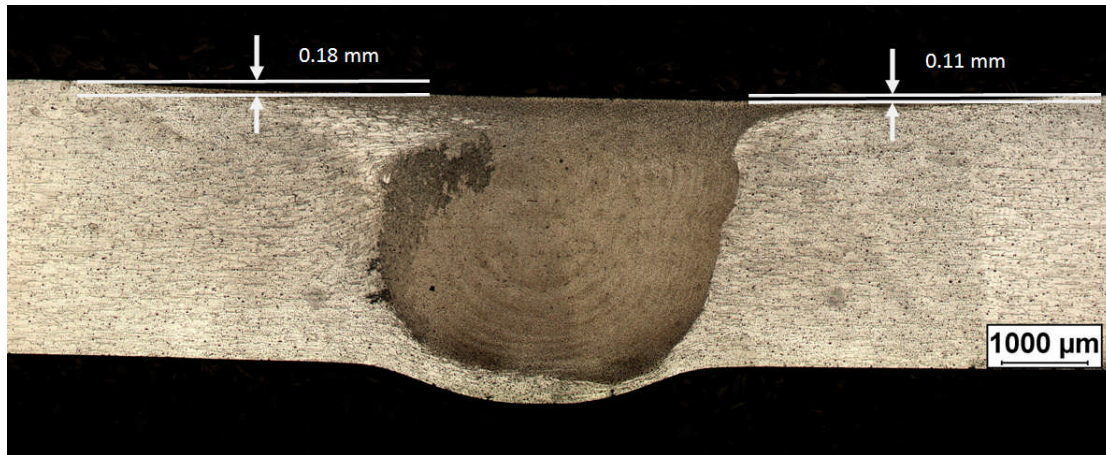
Measurement of the imprint of the FSW tool into the workpiece material.
